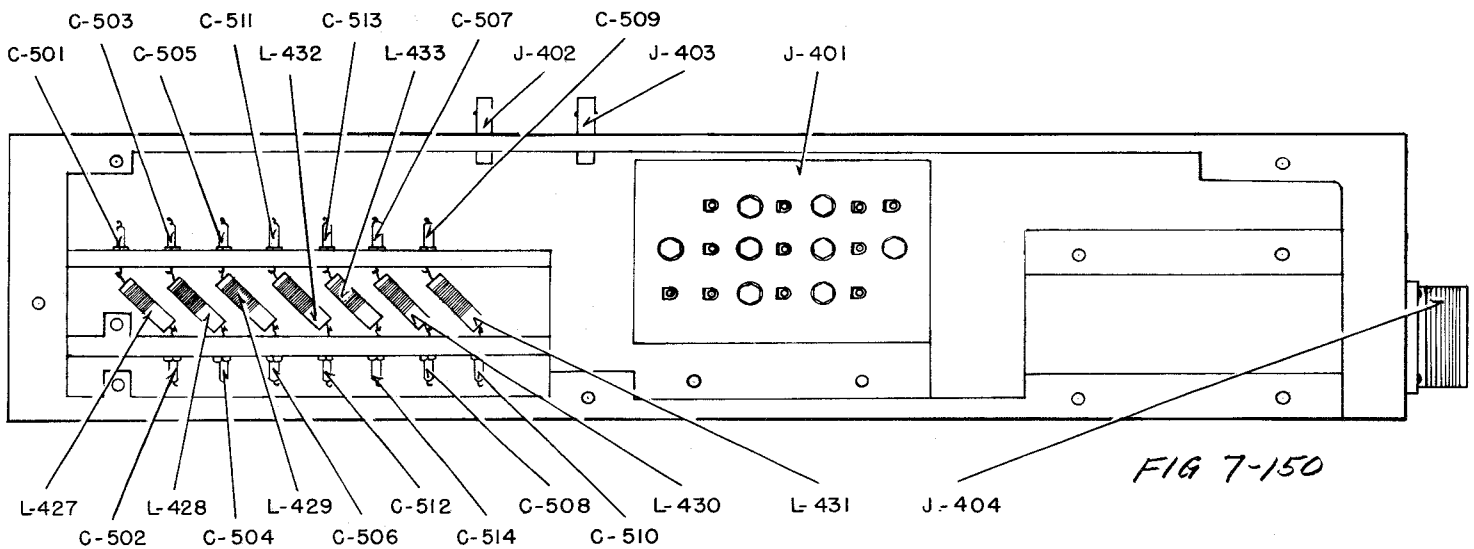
Component Locations Inside of R.F. Filter Compartment, Filter Assembly F-99/FRR-24
